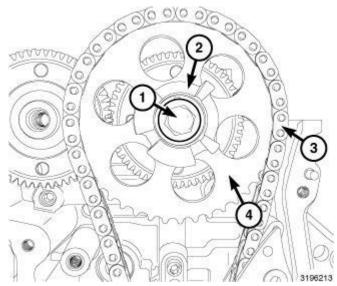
Crankshaft Timing Chain Sprocket With Beveled Edge Courtesy of CHRYSLER GROUP, LLC
